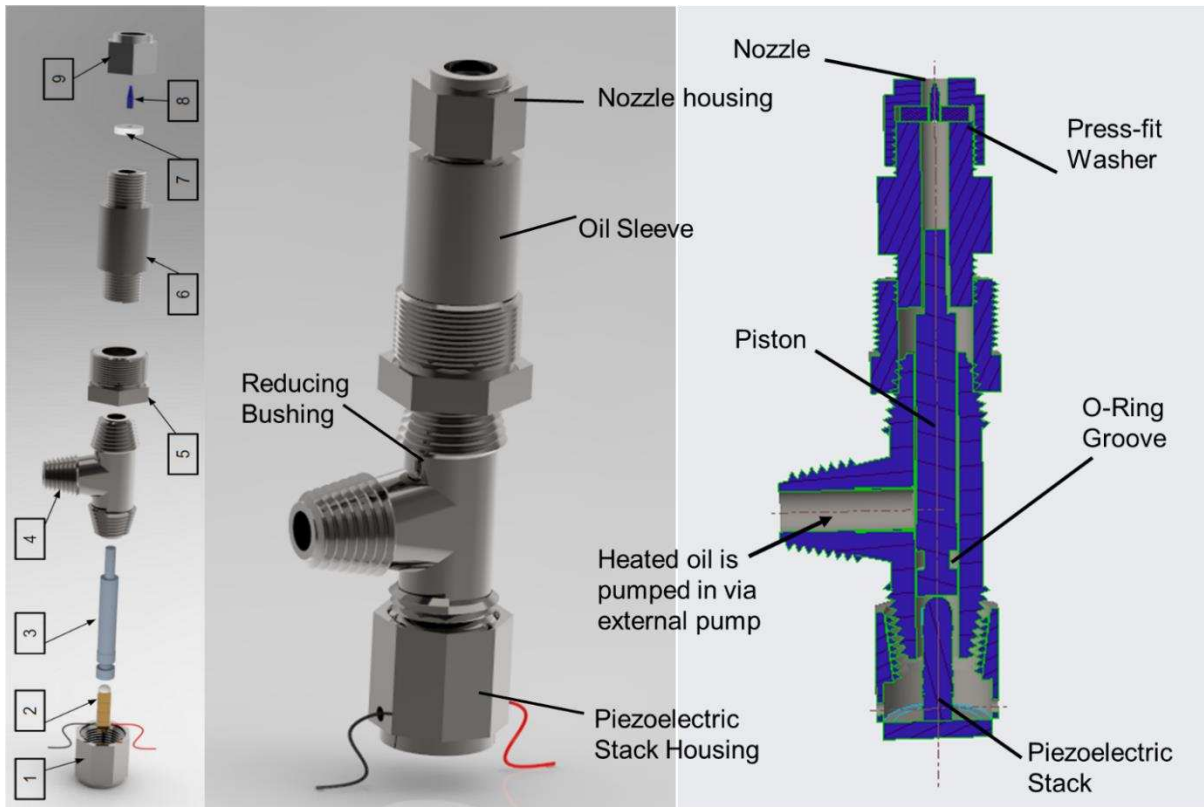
(A) Exploded view of the model of Piezoelectric Stack Droplet Generator, (B) Solid model of the Droplet Generator, and (C) Cross-sectional view of Droplet Generator
